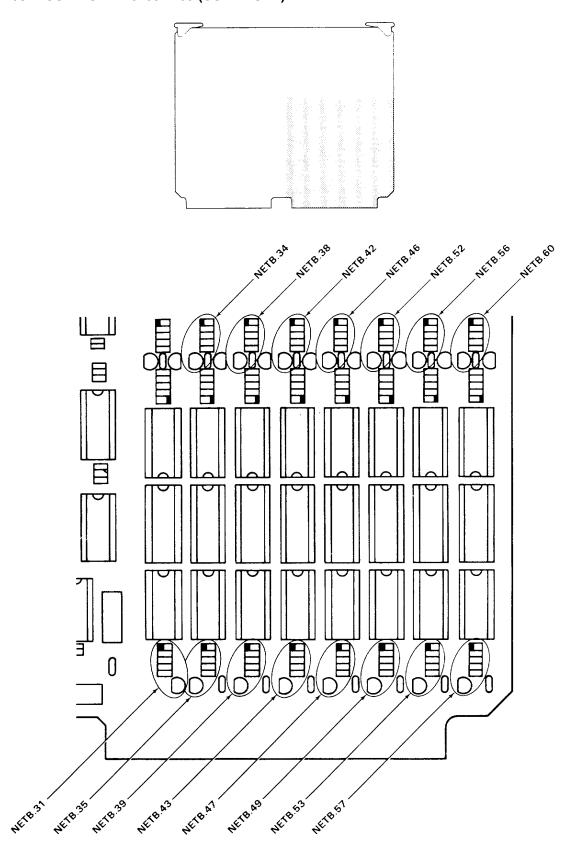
Driver/Sensor Component Layout (Sheet 4 of 4)
